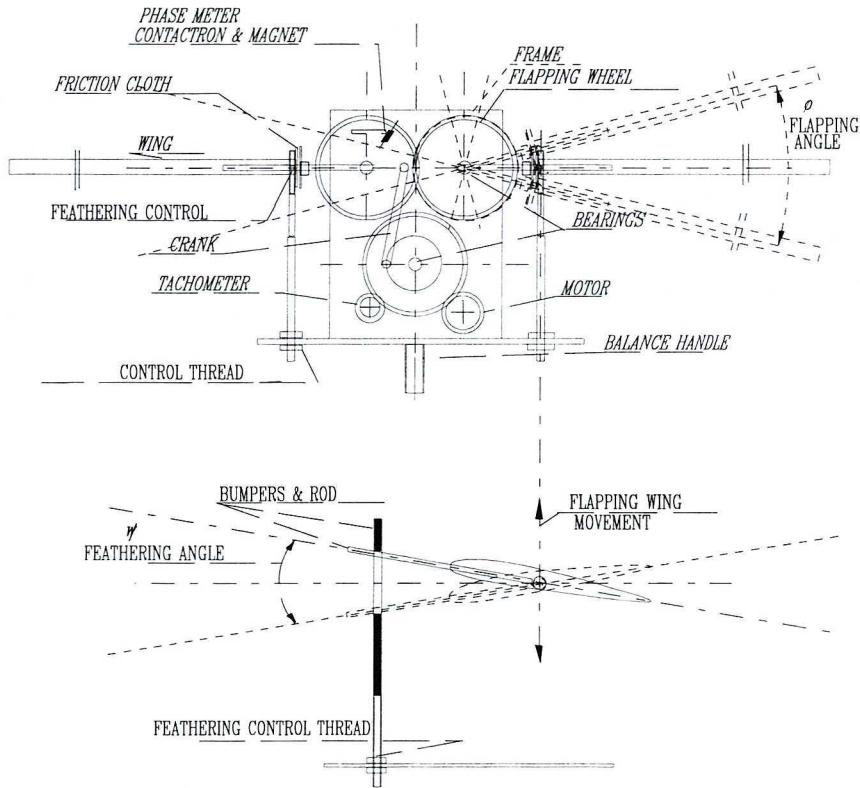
Scheme of moving wing mechanism (front view) and angle of attack control
